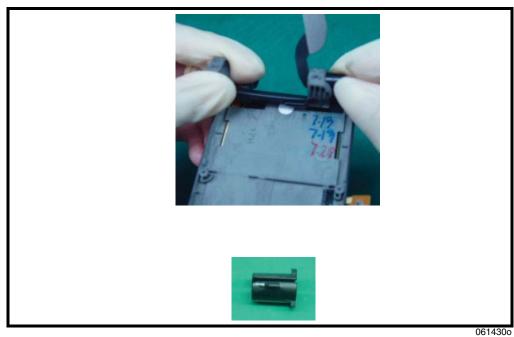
Removing the Flip Hinge Assembly Barrel Guide
